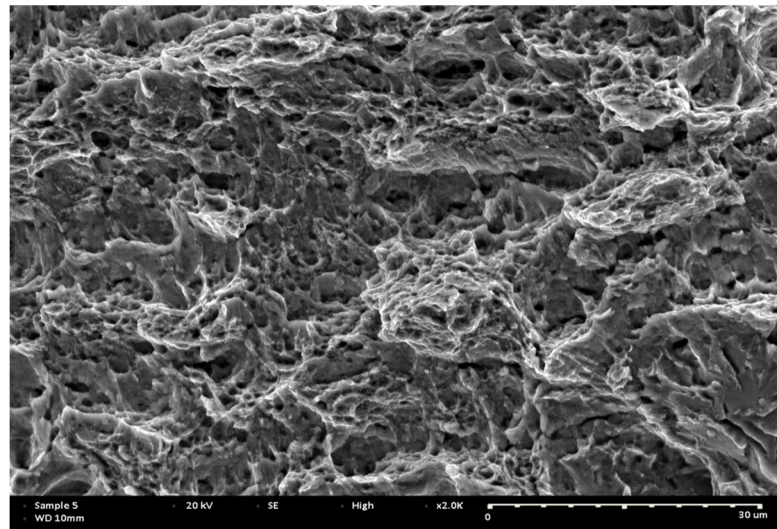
11: Fractured surface of the tensile testing specimen of quenched and tempered H13 tool steel
